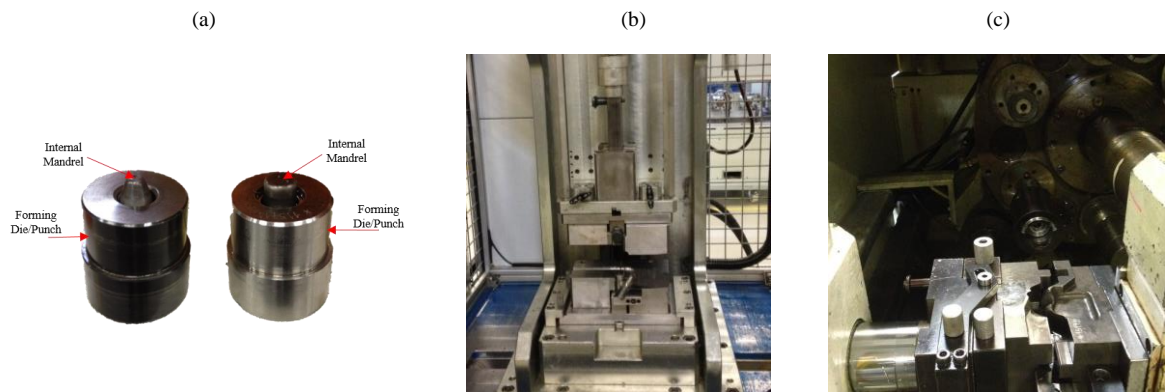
(a) Forming tools, (b) cutting machine, (c) horizontal press machine and JIG tool.
